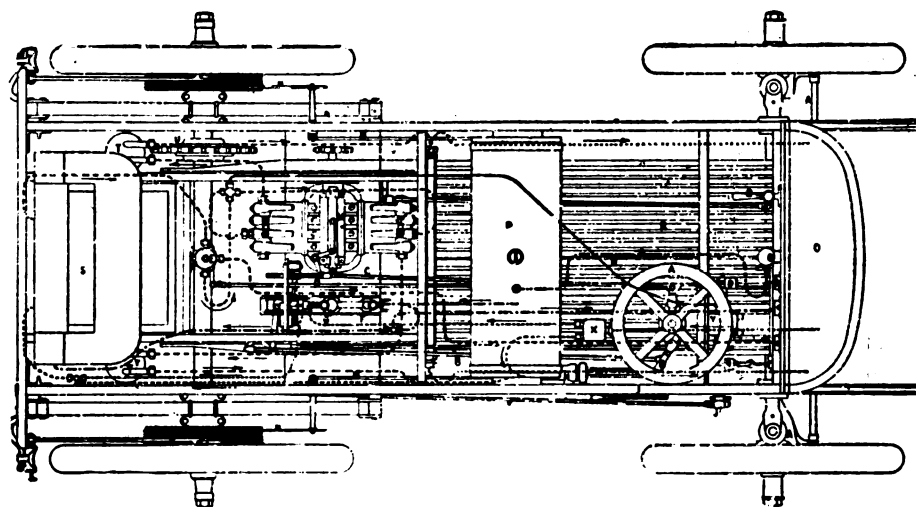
PLAN OF SERPOLLET STEAM CAR.
